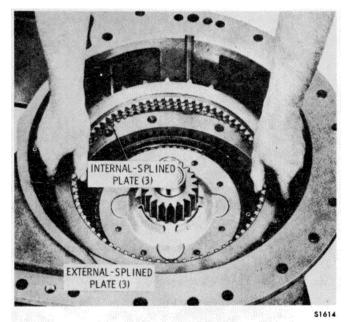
Removing Third-and-Fourth-Gear Clutch Plates.
